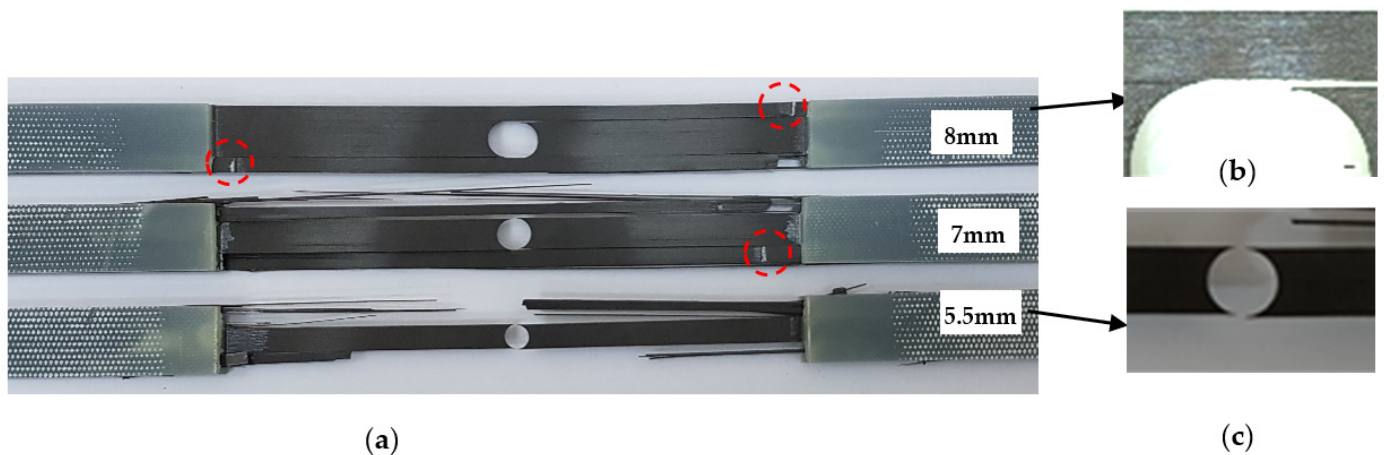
The tensile fracture modes in the holed 0° coupons with different diameters; (a) general view; (b) 5.5 mm; (c) 8 mm (the dashed circles indicate the zone where the fracture occurred).
